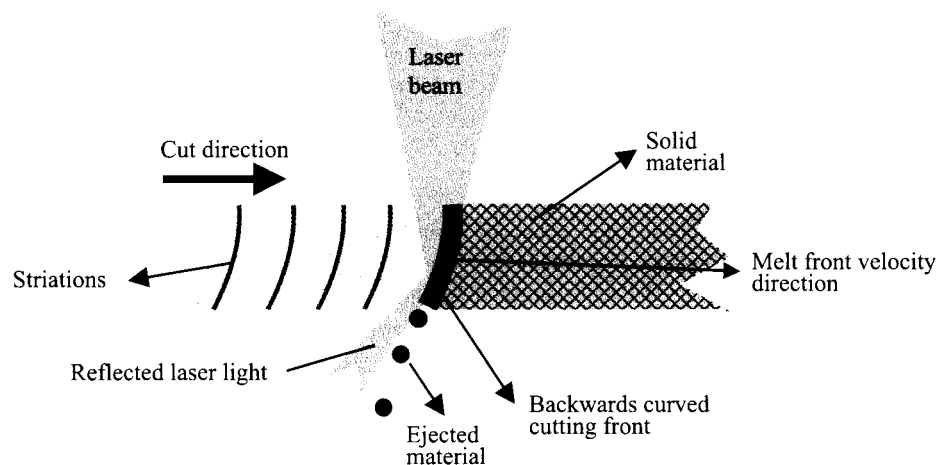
Cross-sectional diagram of workpiece during the cutting process
